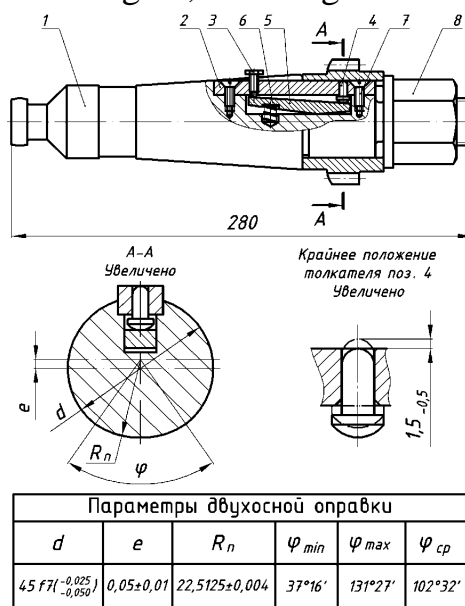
The design of the biaxial mandrel for the installation of blanks on a lathe
